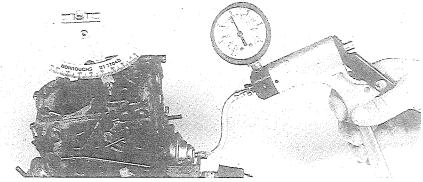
Since the late '70s, GM has specified use of a choke angle gauge instead of a pin gauge or drill bit to set choke blade opening. With choke blade closed, set scale to specified choke angle. Apply a vacuum and adjust pull-off until gauge's bubble is centered.
